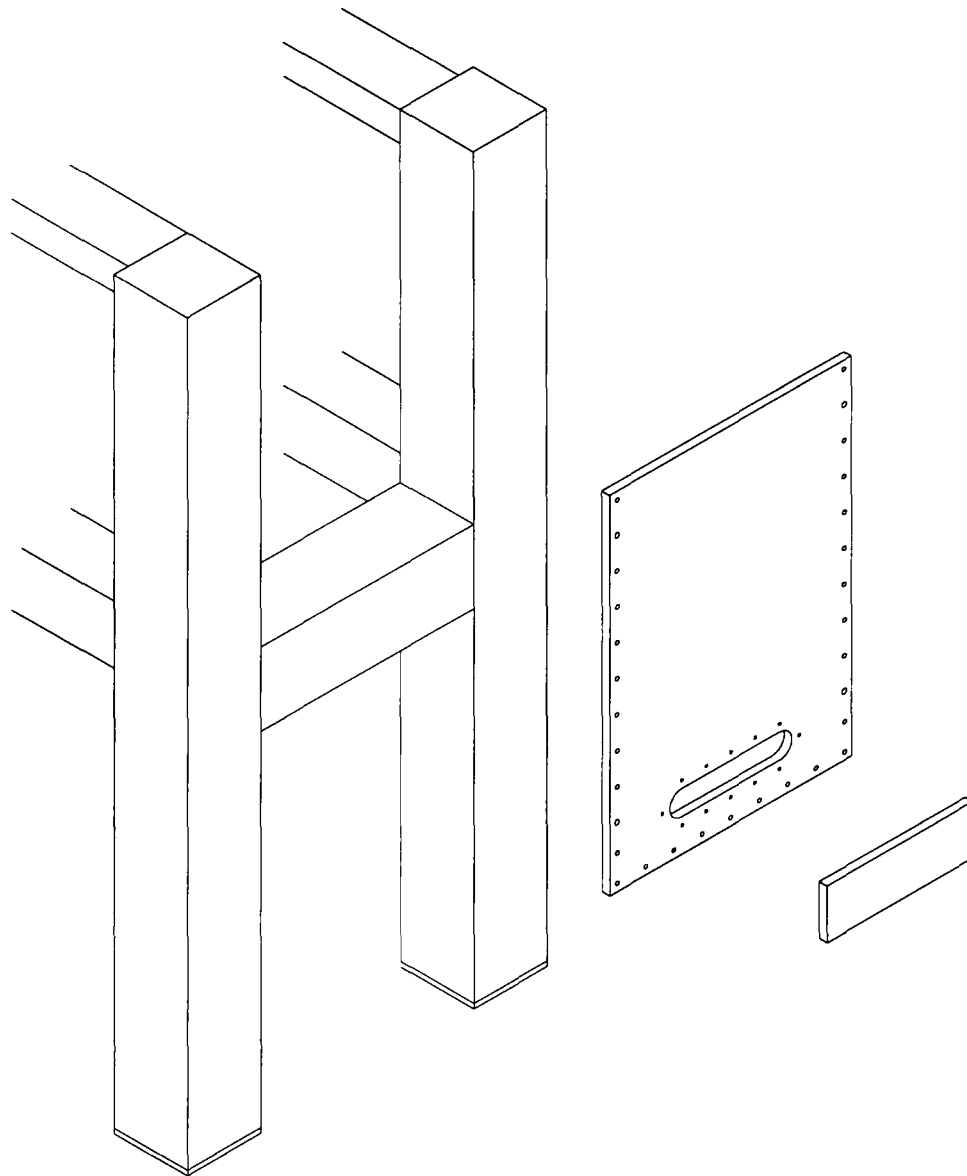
Isometric assembly view of one of the tank end plates
